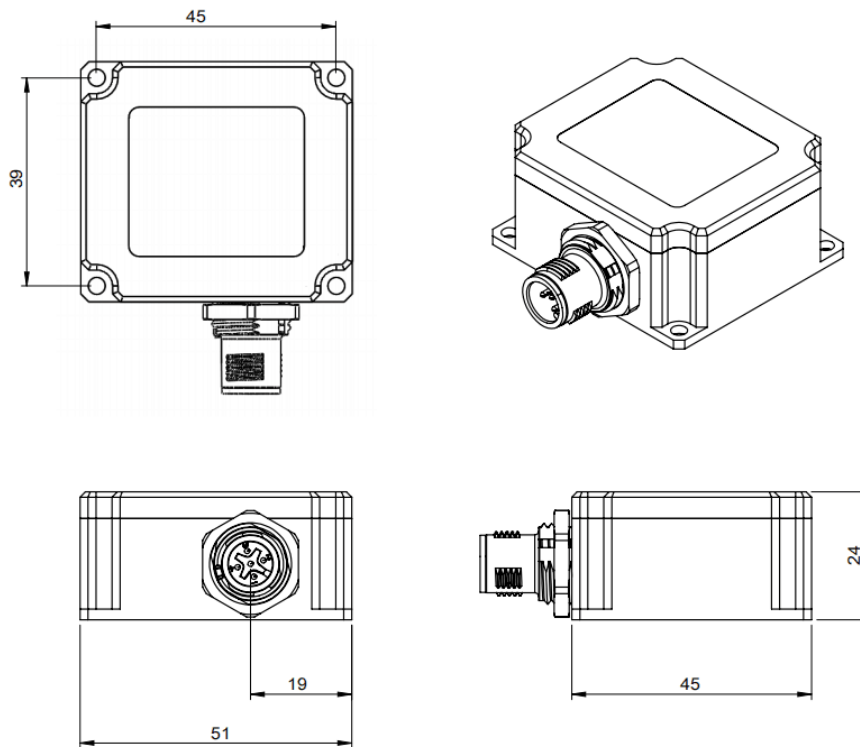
LPMS-IG1 Drawings (Unit: mm)
